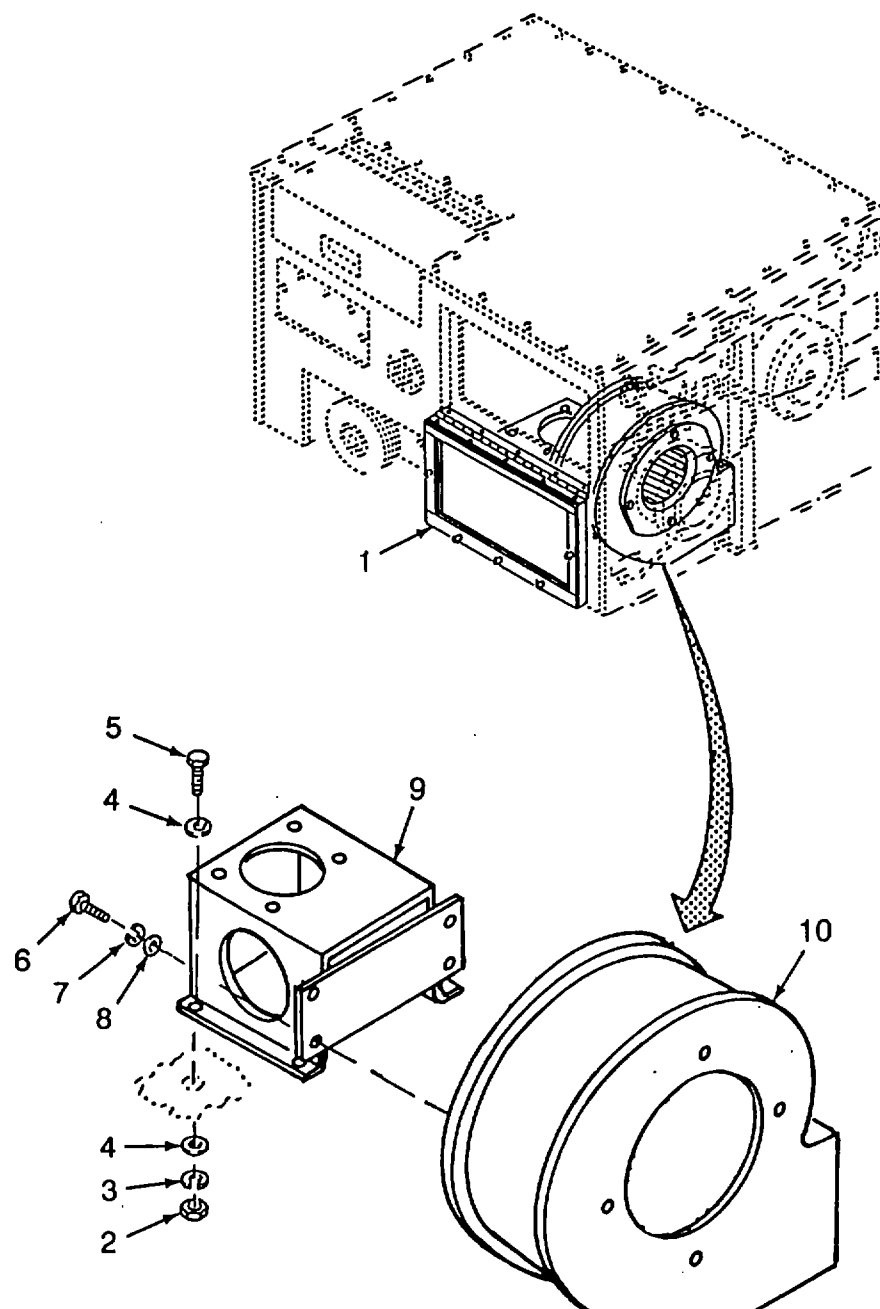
Circulating Air Fan/Pump/Motor Assembly Removal
